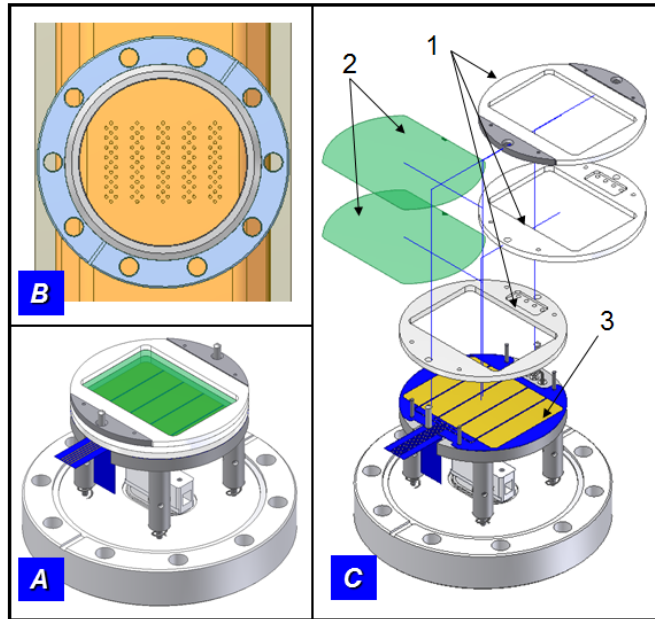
Engineering diagram of an “Insertable I” style RFA. (A) Assembled RFA structure. (B) Vacuum chamber hole pattern. (C) Exploded view of the RFA, showing (1) Macor spacers, (2) stainless steel grids, and (3) flexible circuit collectors.
